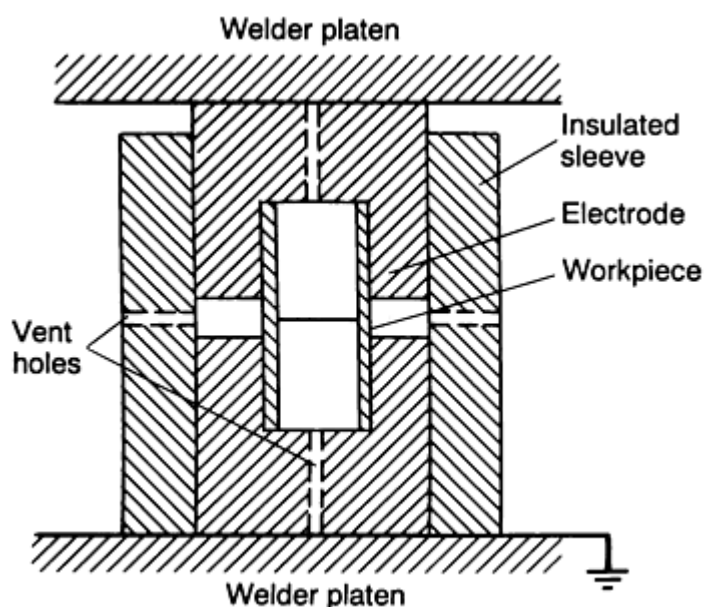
FIXTURING ARRANGEMENT FOR UPSET WELDING OF CYLINDRICAL PARTS
